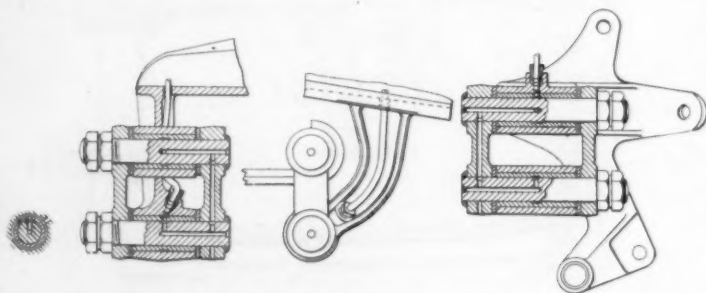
LUBRICATION OF SHACKLE-ASSEMBLIES
